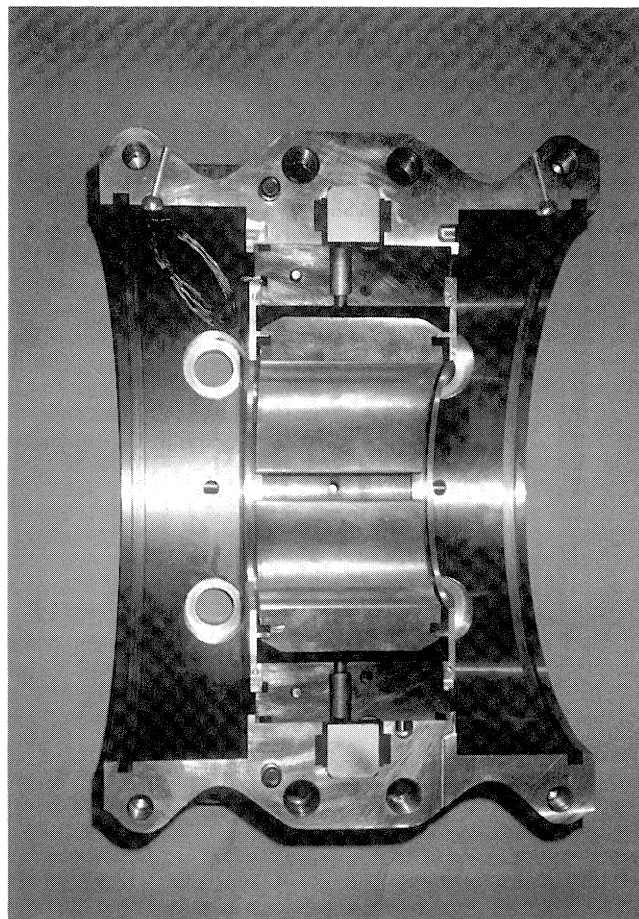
Steam End Squeeze Film Damper Bearing Photograph.
